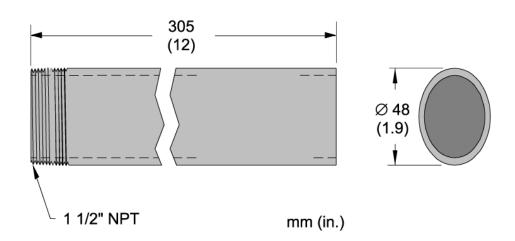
Stainlless Steel Sighting Tube (E-ST12)
